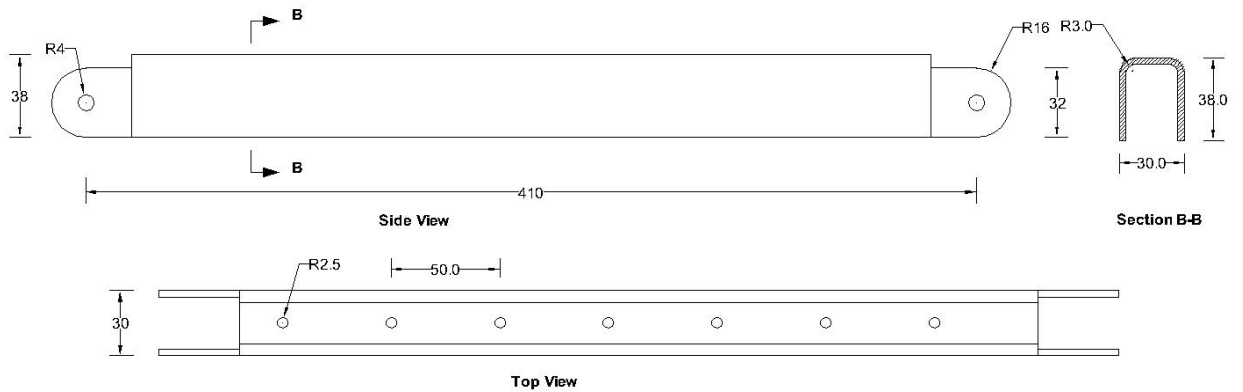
Details of Secondary bars (all dimensions are in mm, steel plate gauge 11).
